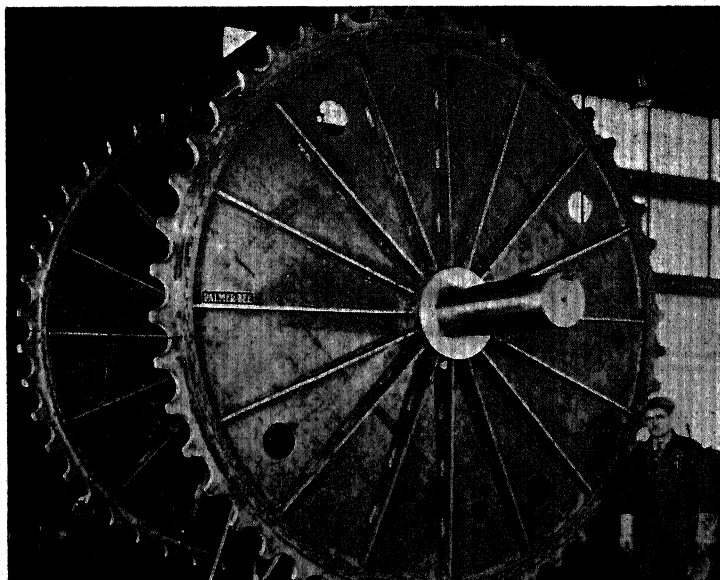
All welded steel sprocket used in a vertical core oven. Overall diameter 13 ft. Finished within a tolerance of $\frac{1}{8}$ ".
